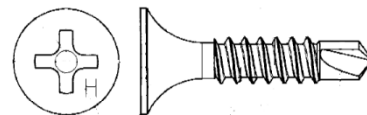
PHILLIPS BUGLE HEAD (PBH) SCREW
